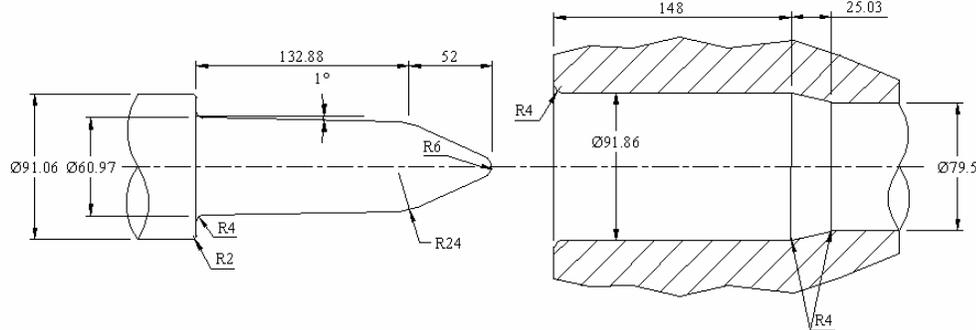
Header tool and gripper die of 2nd stage [3]
